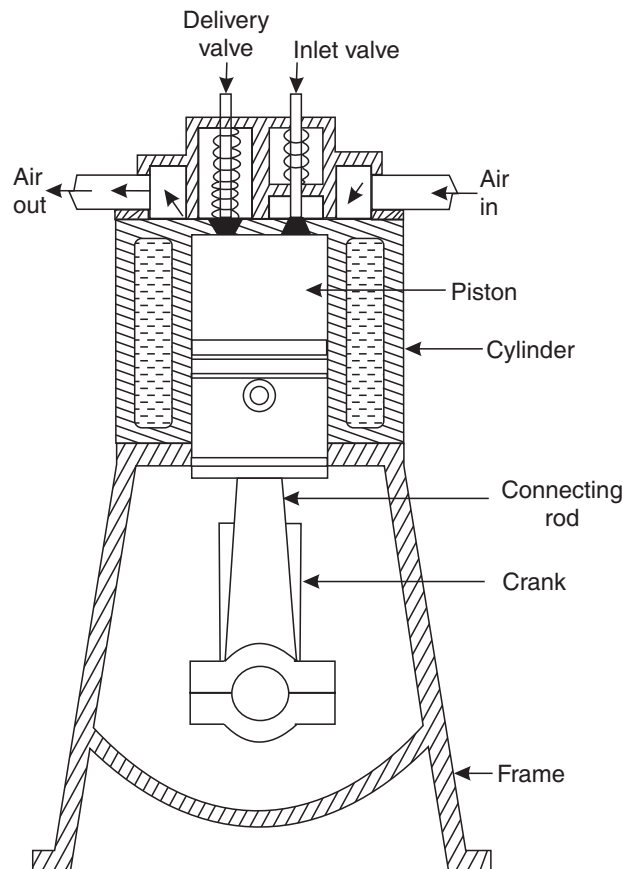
(a) Sectional view of a single-stage reciprocating compressor.
